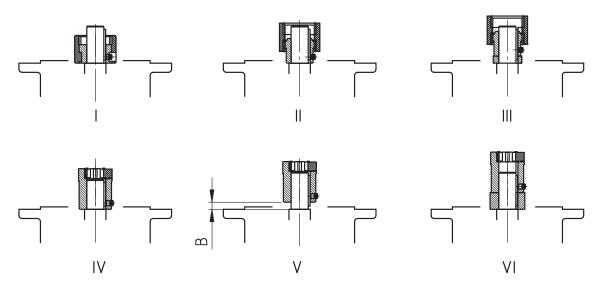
Fitting the coupling onto the motor shaft - various types of coupling
